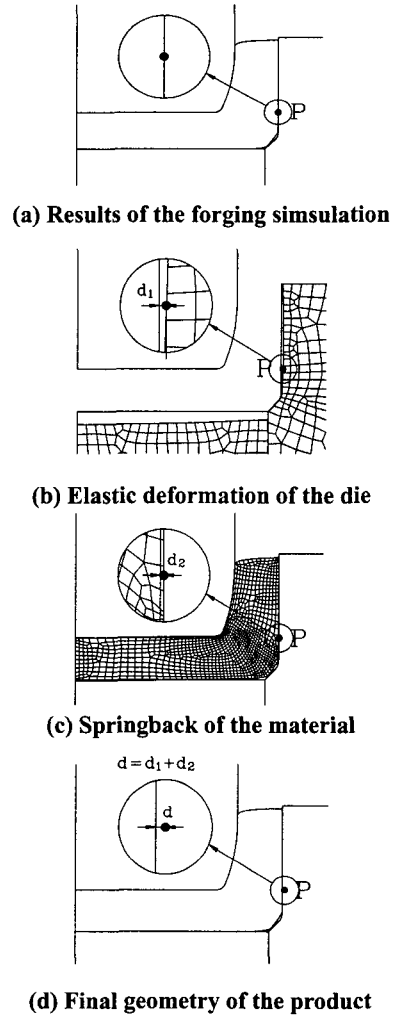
Basic approach to estimating geometric dimensions of cold forgings
